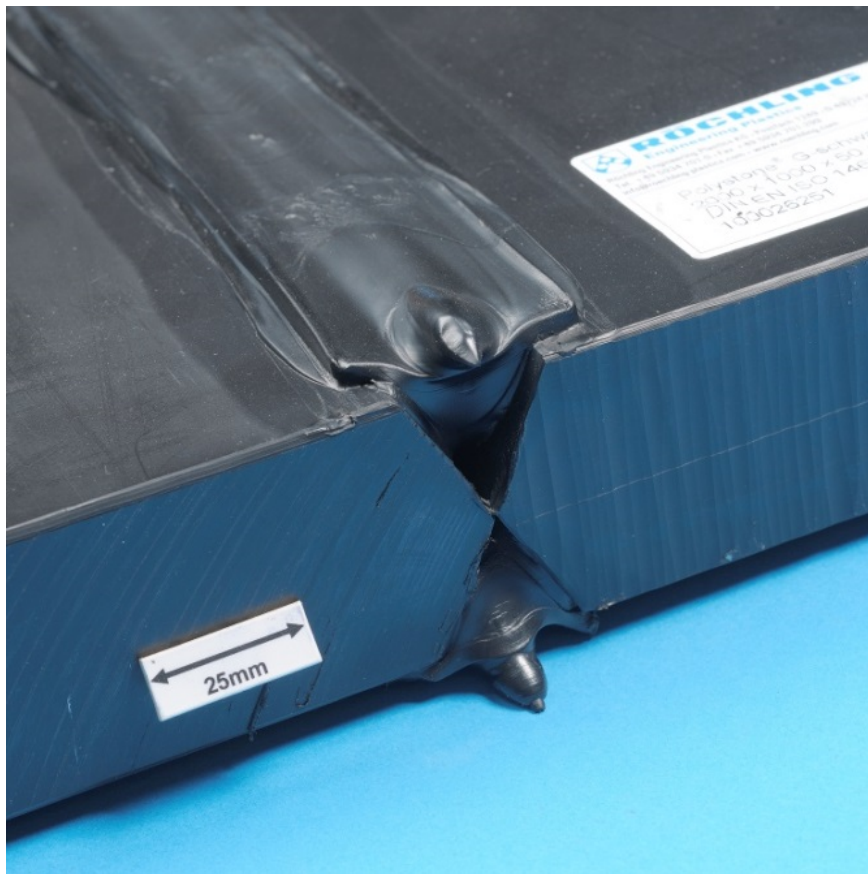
Double-V butt weld in HDPE sheet.
